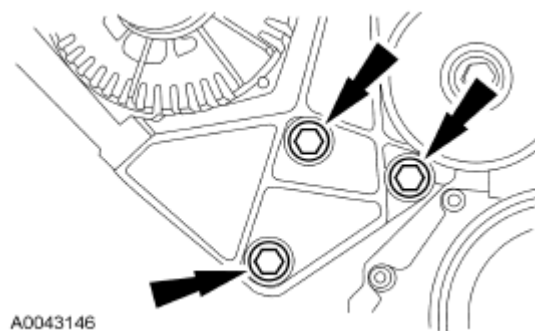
Locating Generator Mounting Bracket Assembly Bolts
